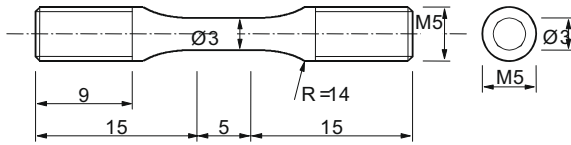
Geometry of test specimen for tensile tests. Measures in millimetre.
